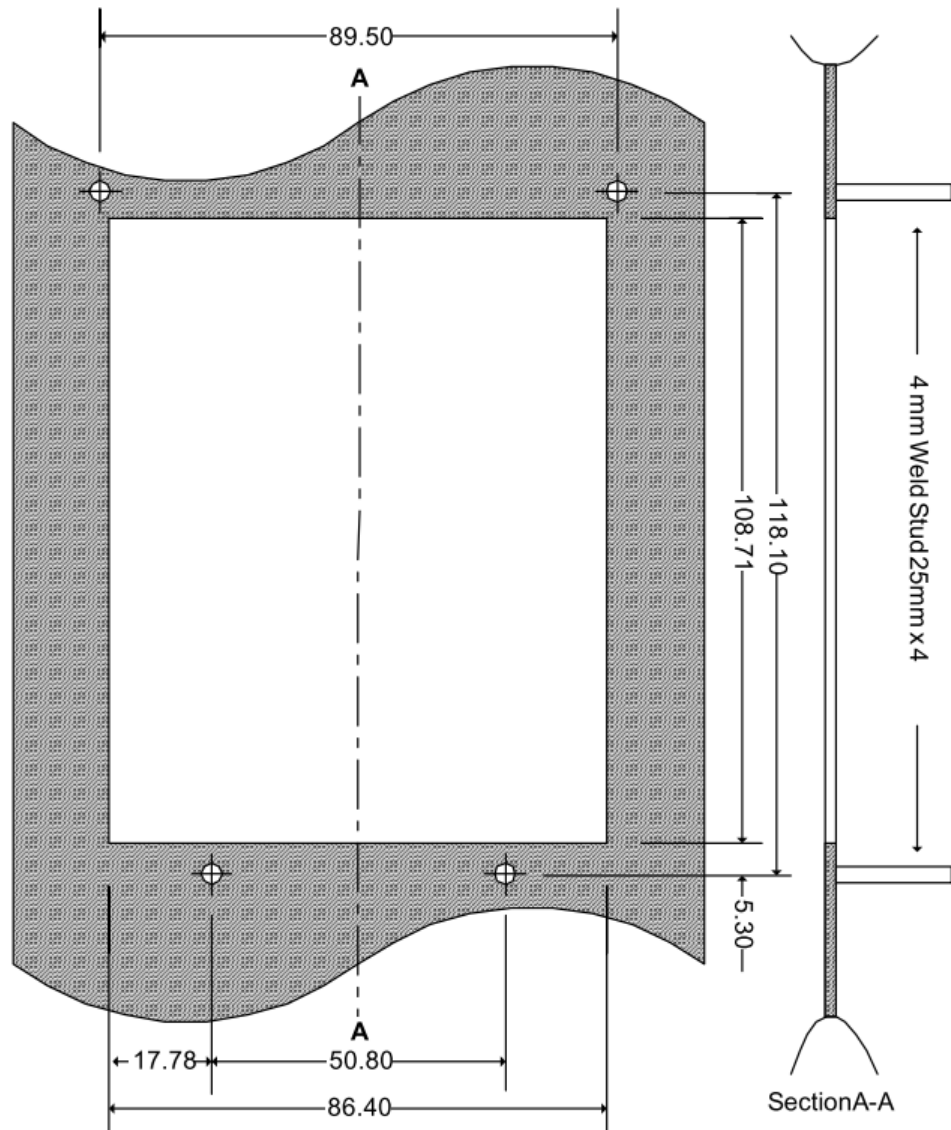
Dimensions of opening and weld studs(mm)
